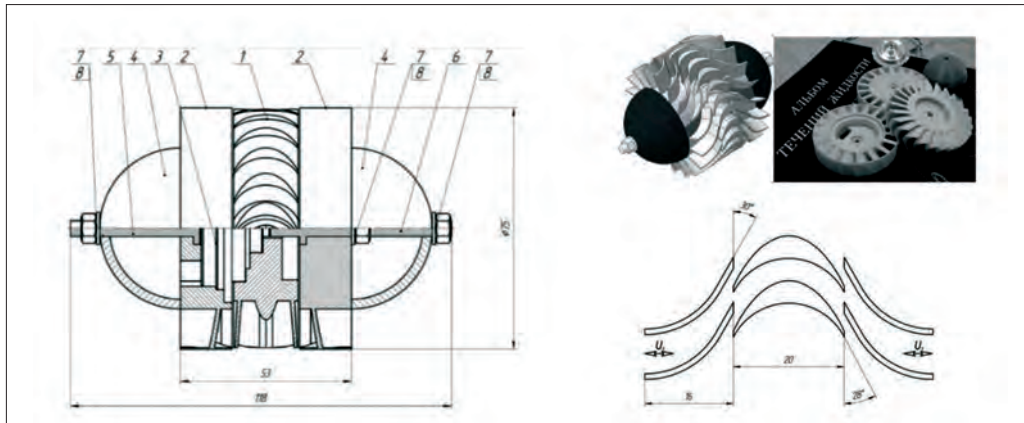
Experimental turbine generator assembly: 1 – turbine rotor, 2 – stator, 3 – generator, 4 – fairing, 5 and 6 – turbine axes, 7 and 8 – fasteners
